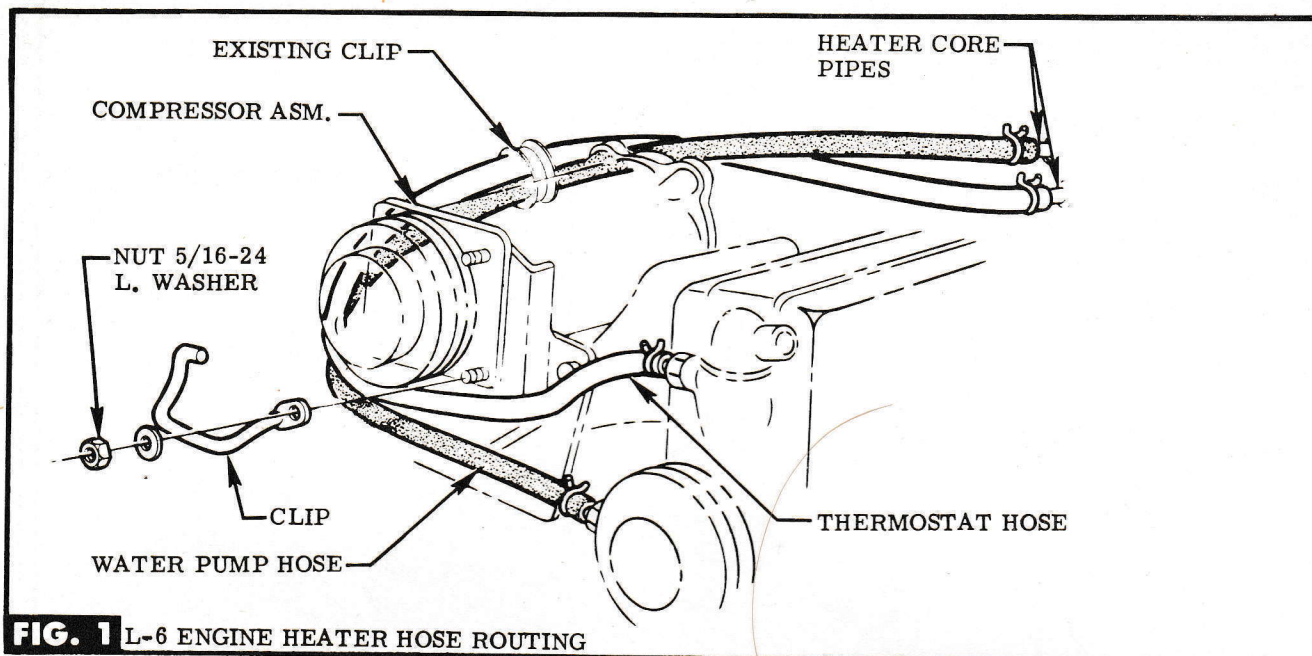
L-6 ENGINE HEATER HOSE ROUTING
